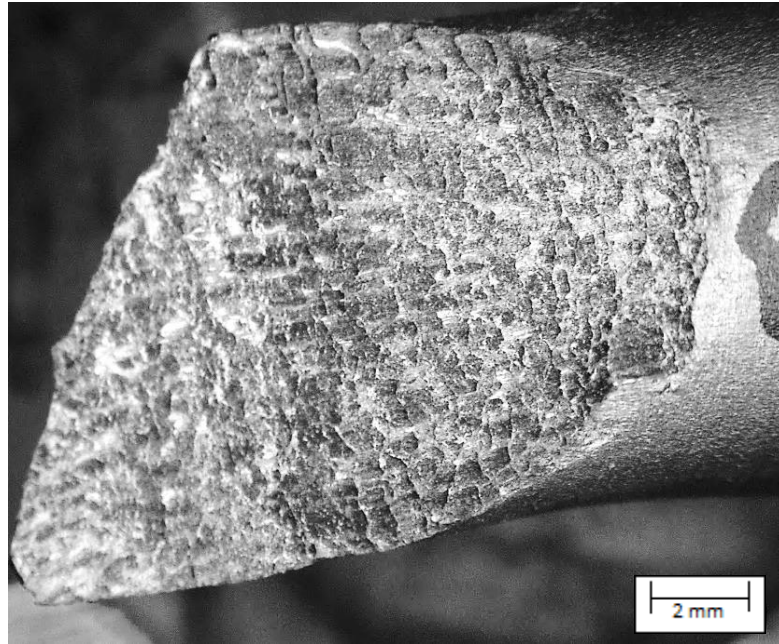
Stereoscopic image of the fracture surface of the the reduced section round tensile test sample (No heat treatment prior to welding and a 672h PWHT at 635°C). RA = 44%
